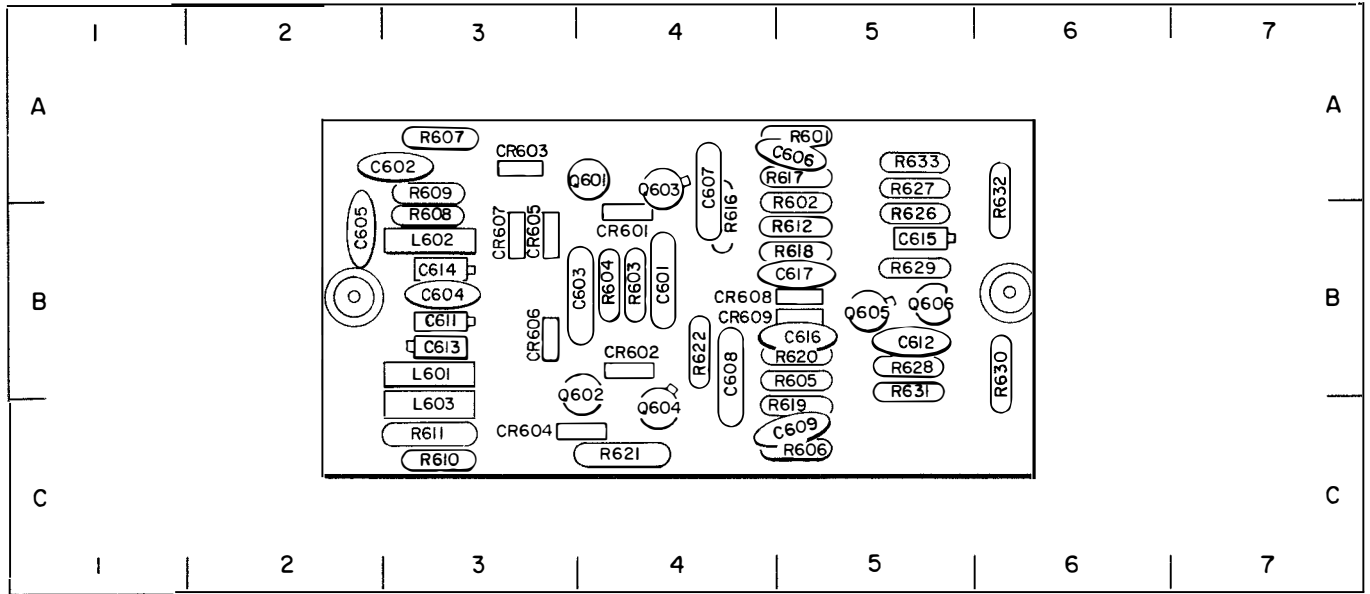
Multivibrator Circuit Board A2A5, Location of Parts
